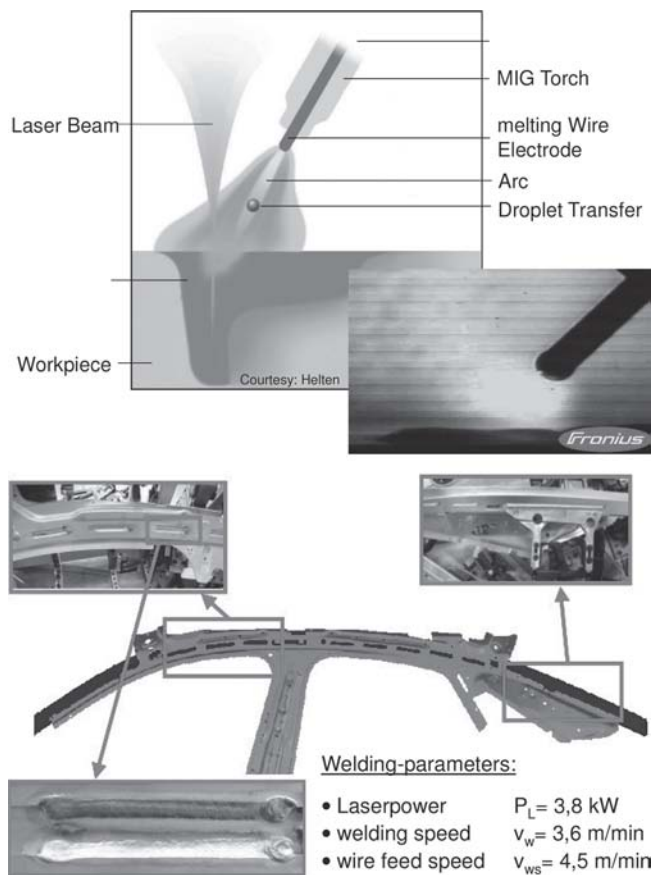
Laser-MIG-Hybrid welding of car roof structure, (Courtesy: Audi)
